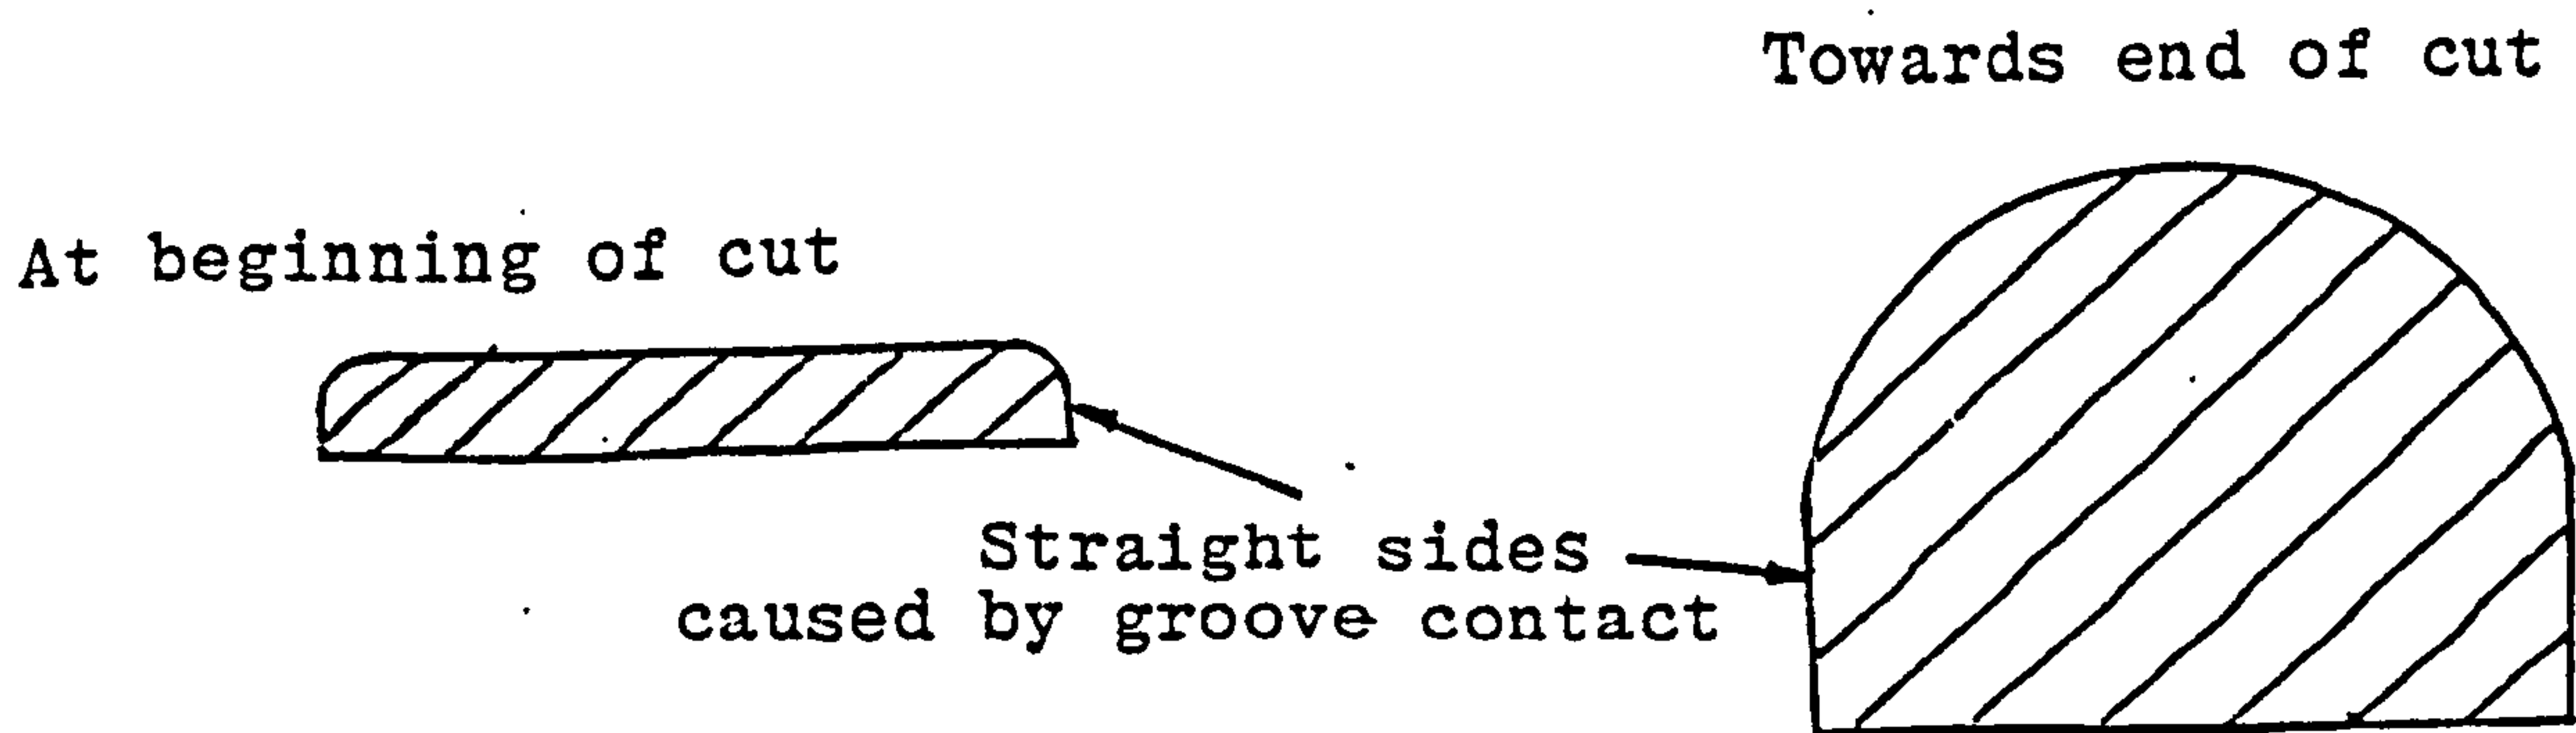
SOME FEATURES OF COPPER CHIPS PRODUCED DURING GROOVE CUTTING
